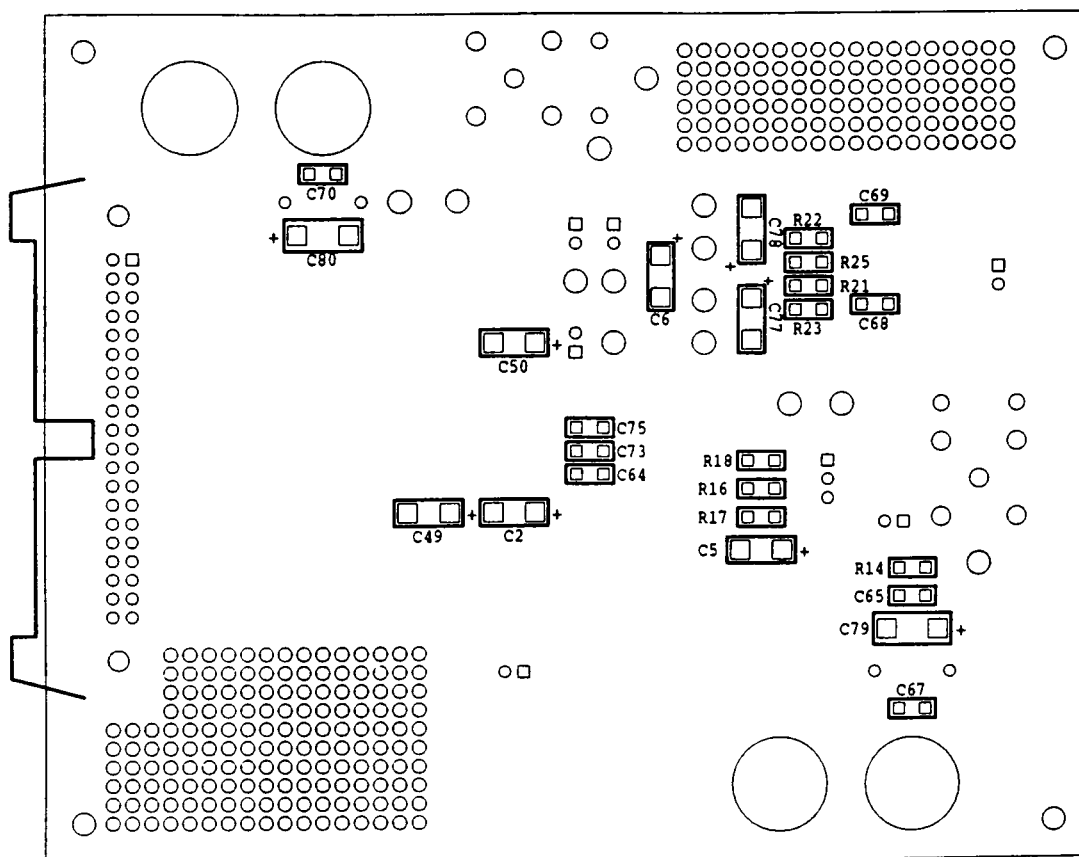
Silkscreen Layer, Circuit Side PCB Layout
